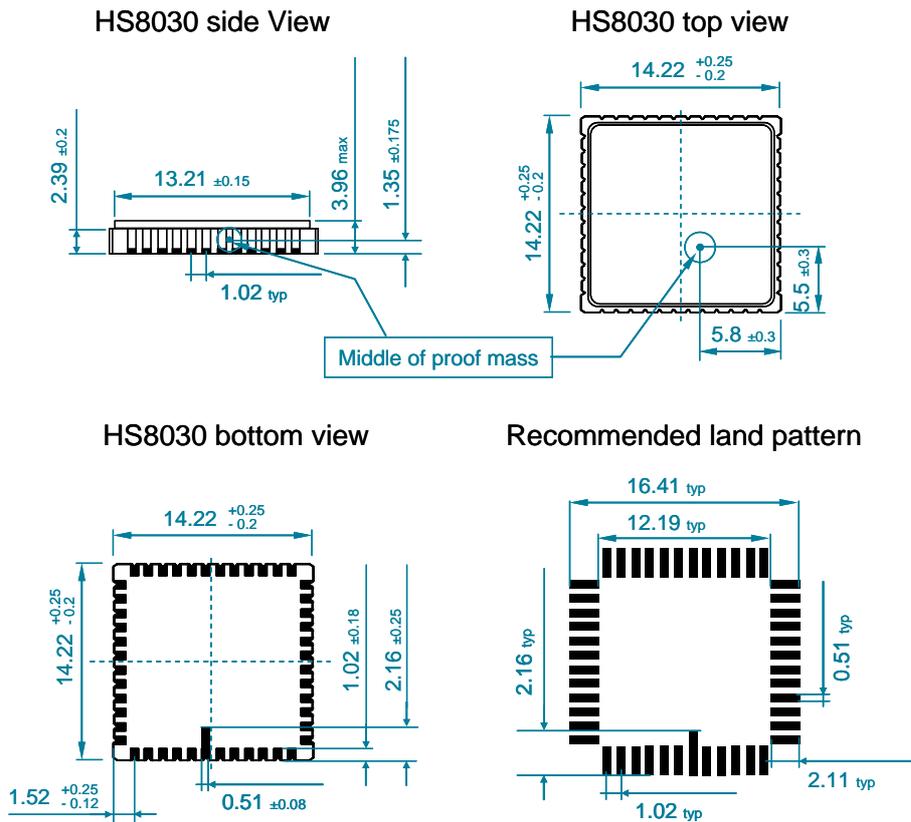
HS8030.D Packaging Size (all dimensions in mm)
